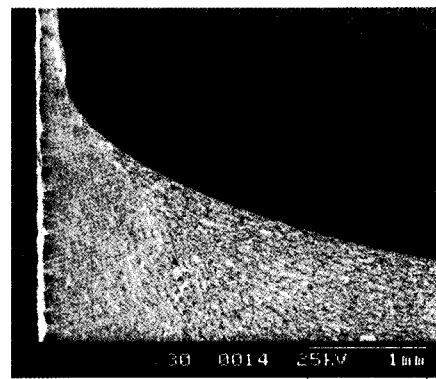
SEM Photographs of Fracture Surface(Shot-peening, RT)
